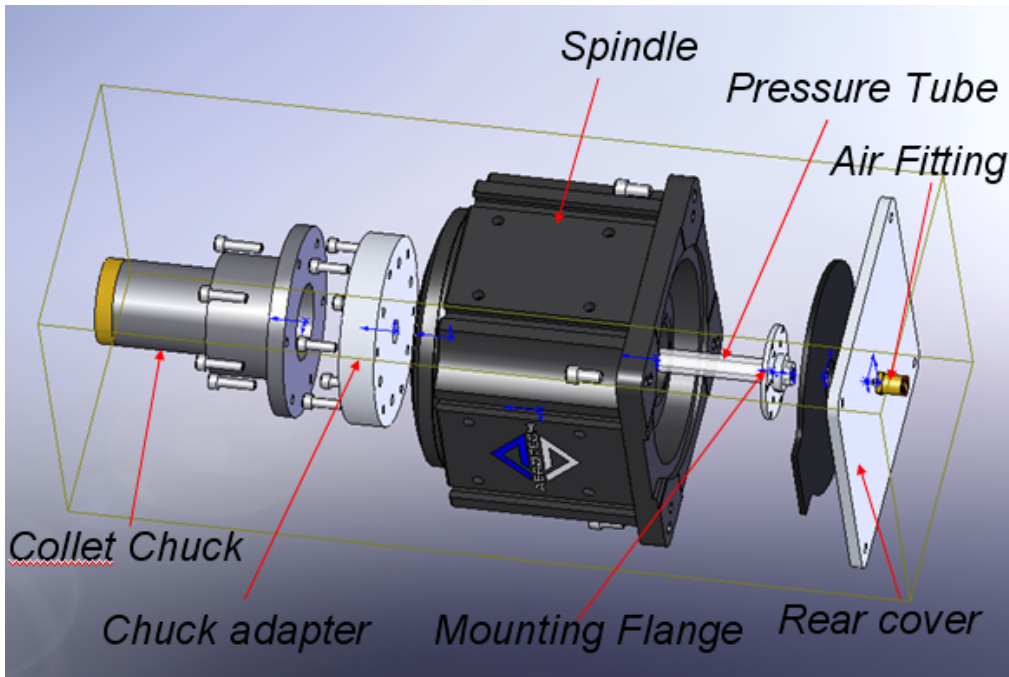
Exploded view of ϕ -axis assembly with air-actuated collet chuck. The nylon pressure tube has a 25 μm clearance to the rear cover to allow for a non-influencing air coupling with minimal loss of pressure.
